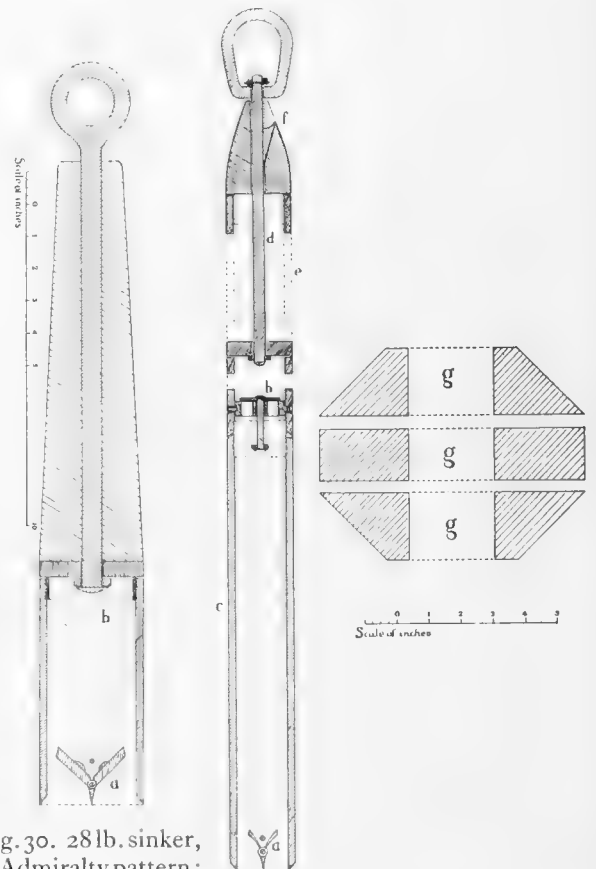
28 lb. sinker, Admiralty pattern: sectional view.
